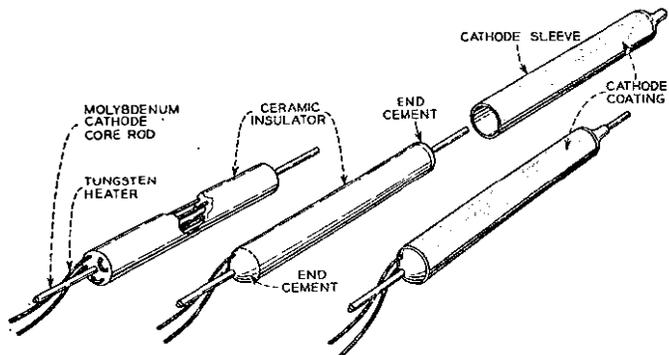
HEATER, HEATER INSULATOR AND CATHODE ASSEMBLY OF THE 175HQ VALVE.
